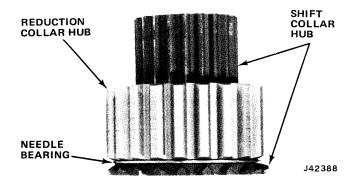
Needle Bearing and Reduction Collar Hub
